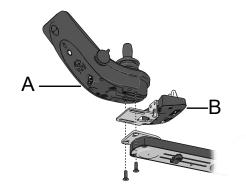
The control panel is held in place by two screws on the parallel panel holder.
